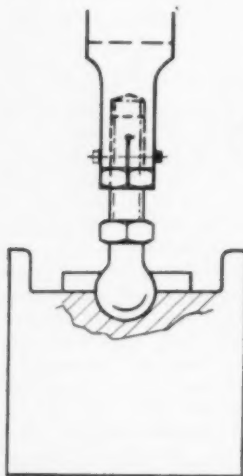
(left).—One method used to adjust the position of the slide relative to the connecting rod
